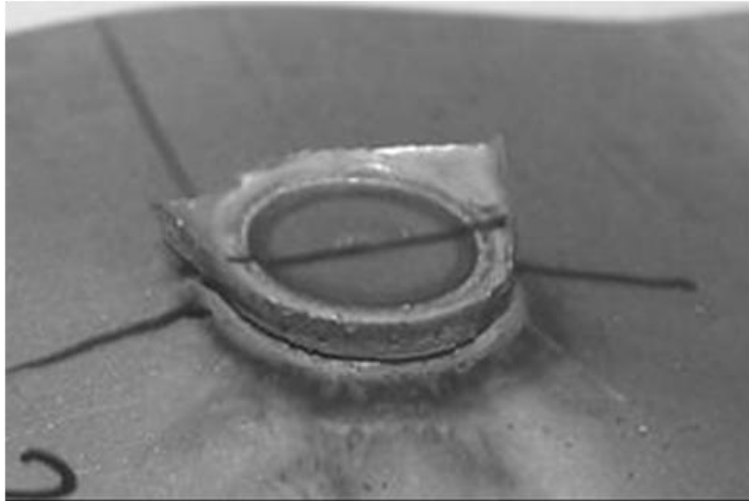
Weld failure in the base material after three step weld scheme in TRIP700 steel containing 0.216 wt% C and 0.033 wt% P (Den Uijl & Smith, 2006).
